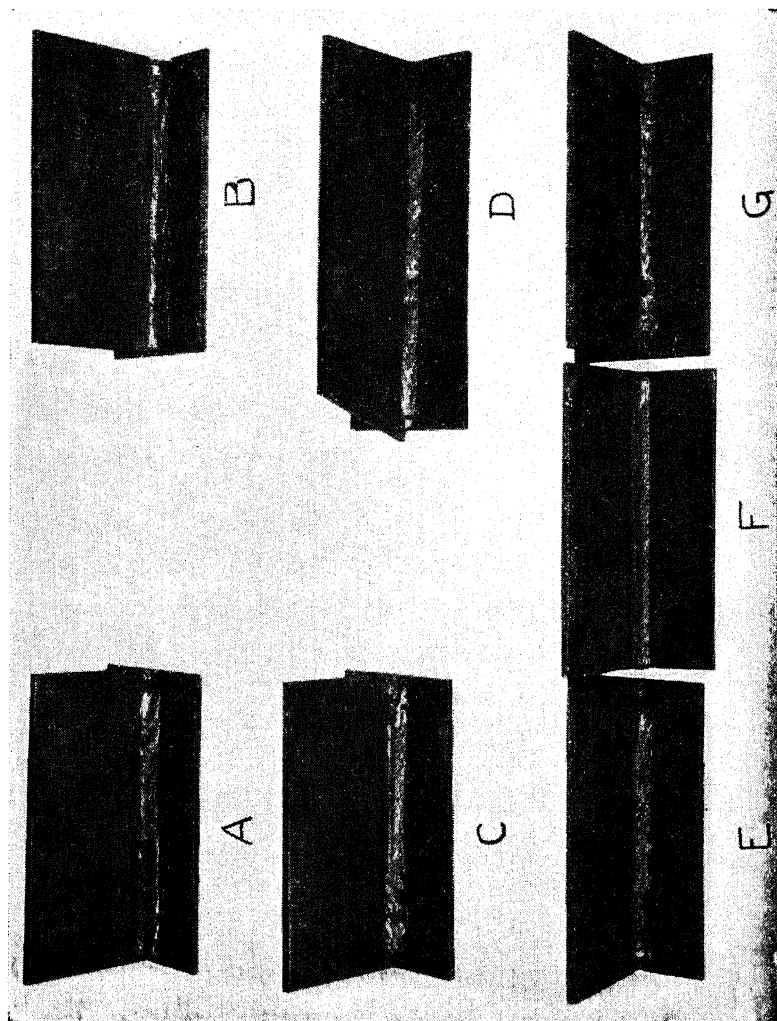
Fillet weld specimens made with shielded arc electrode. See table on page 128 for explanation
